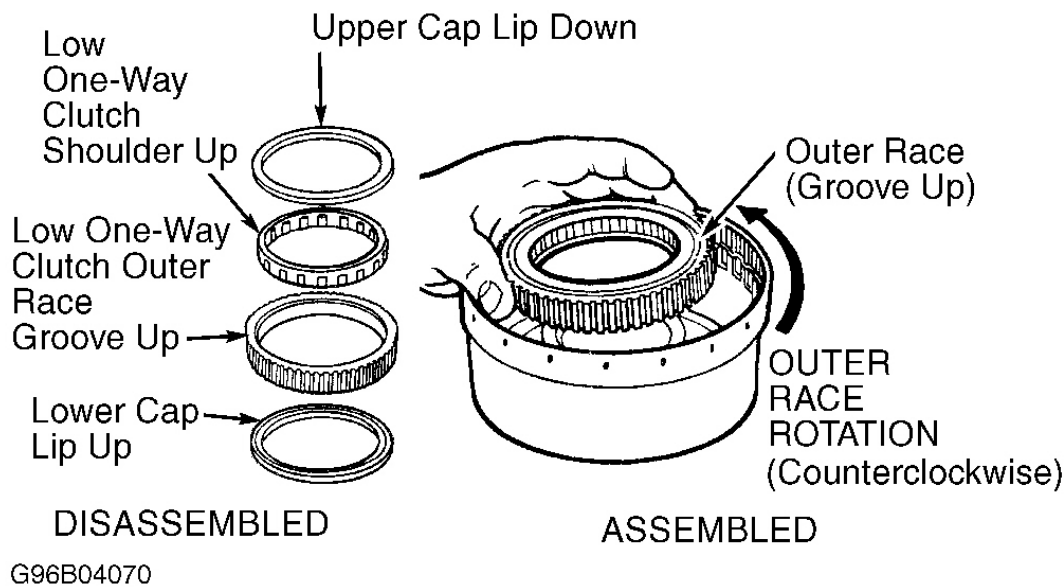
Identifying Low One-Way Clutch Components & Rotation
